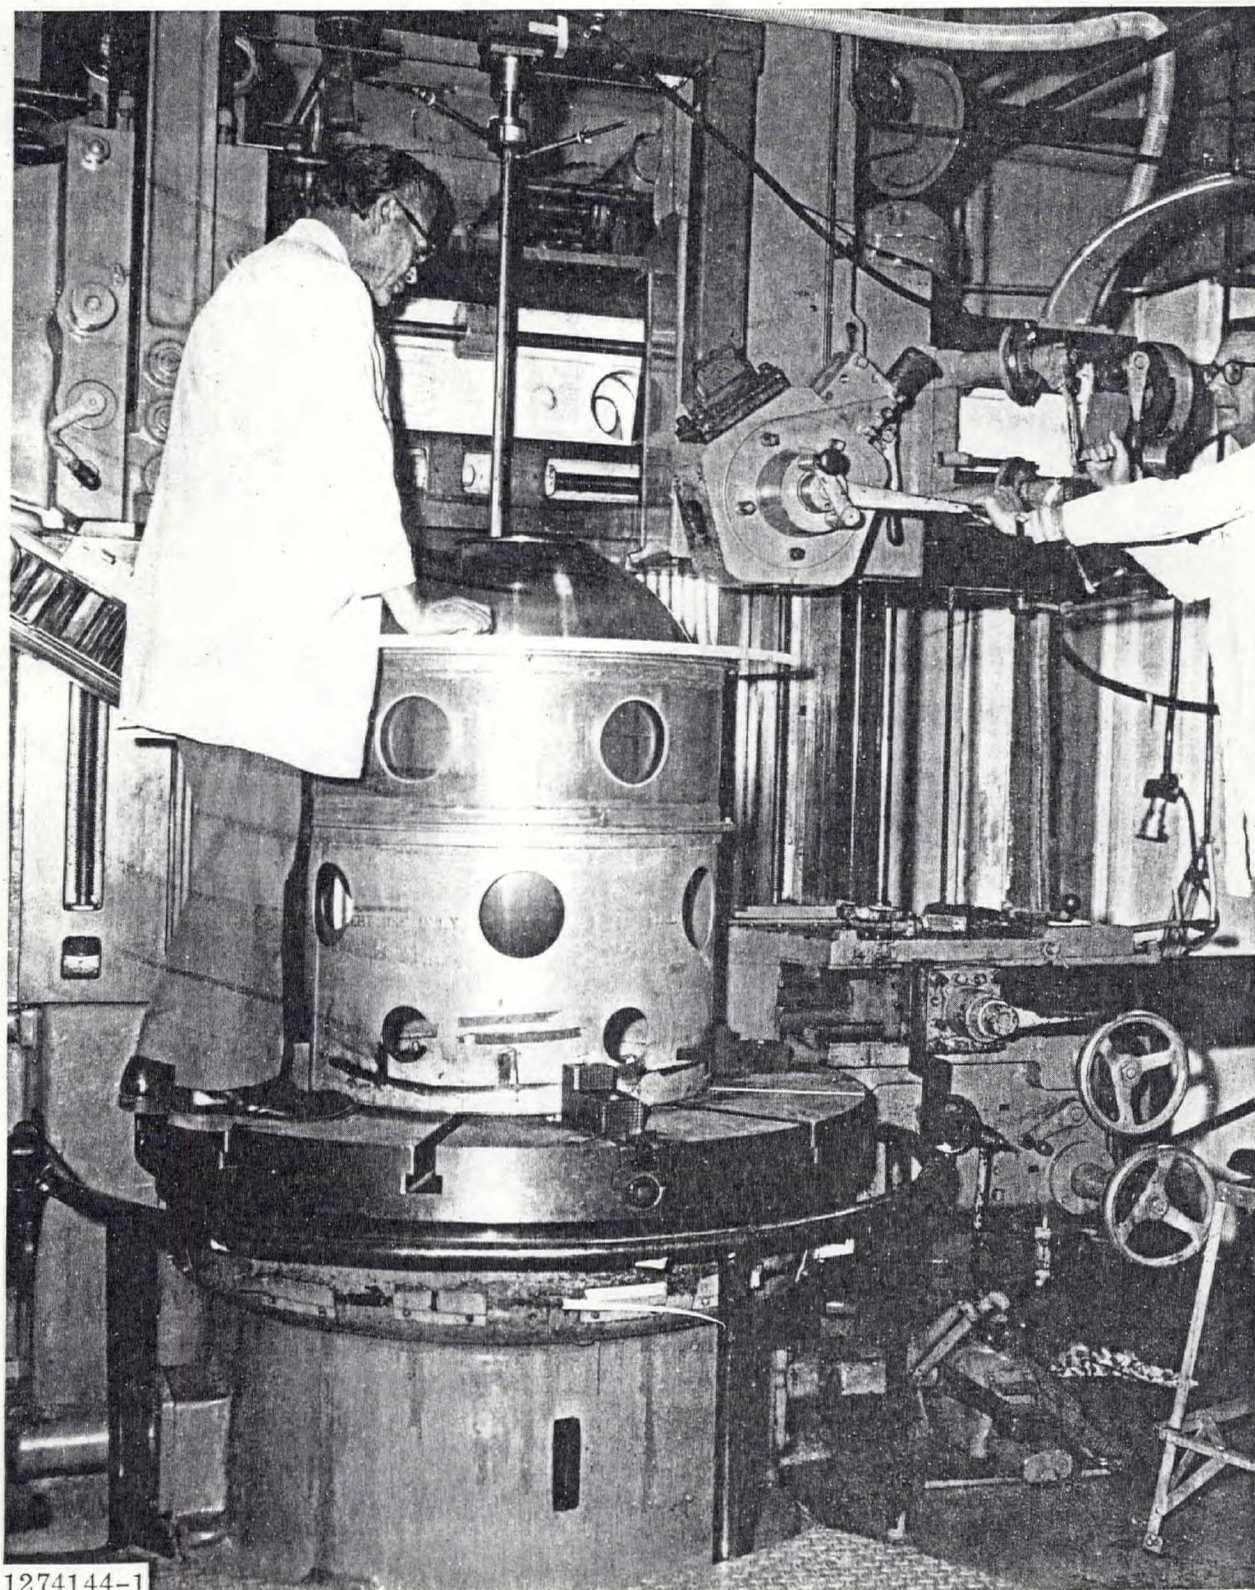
GISHOLT VERTICAL BALANCING MACHINE,
